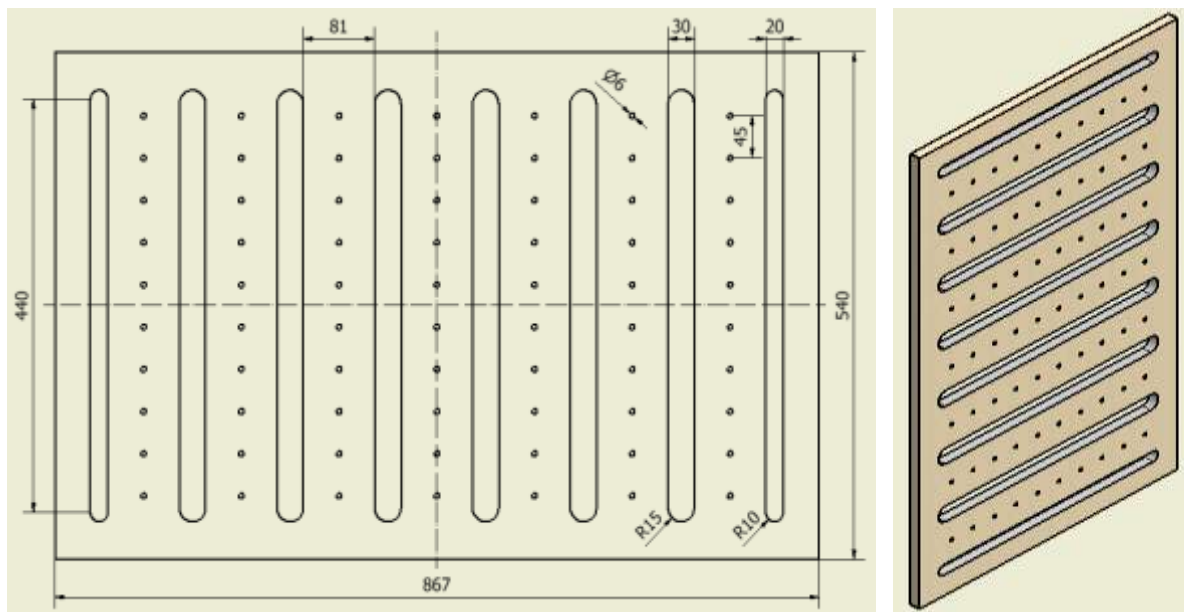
Machined backing board for the weathering rack used for outdoor exposure tests of veneered and coated composite wood blocks
